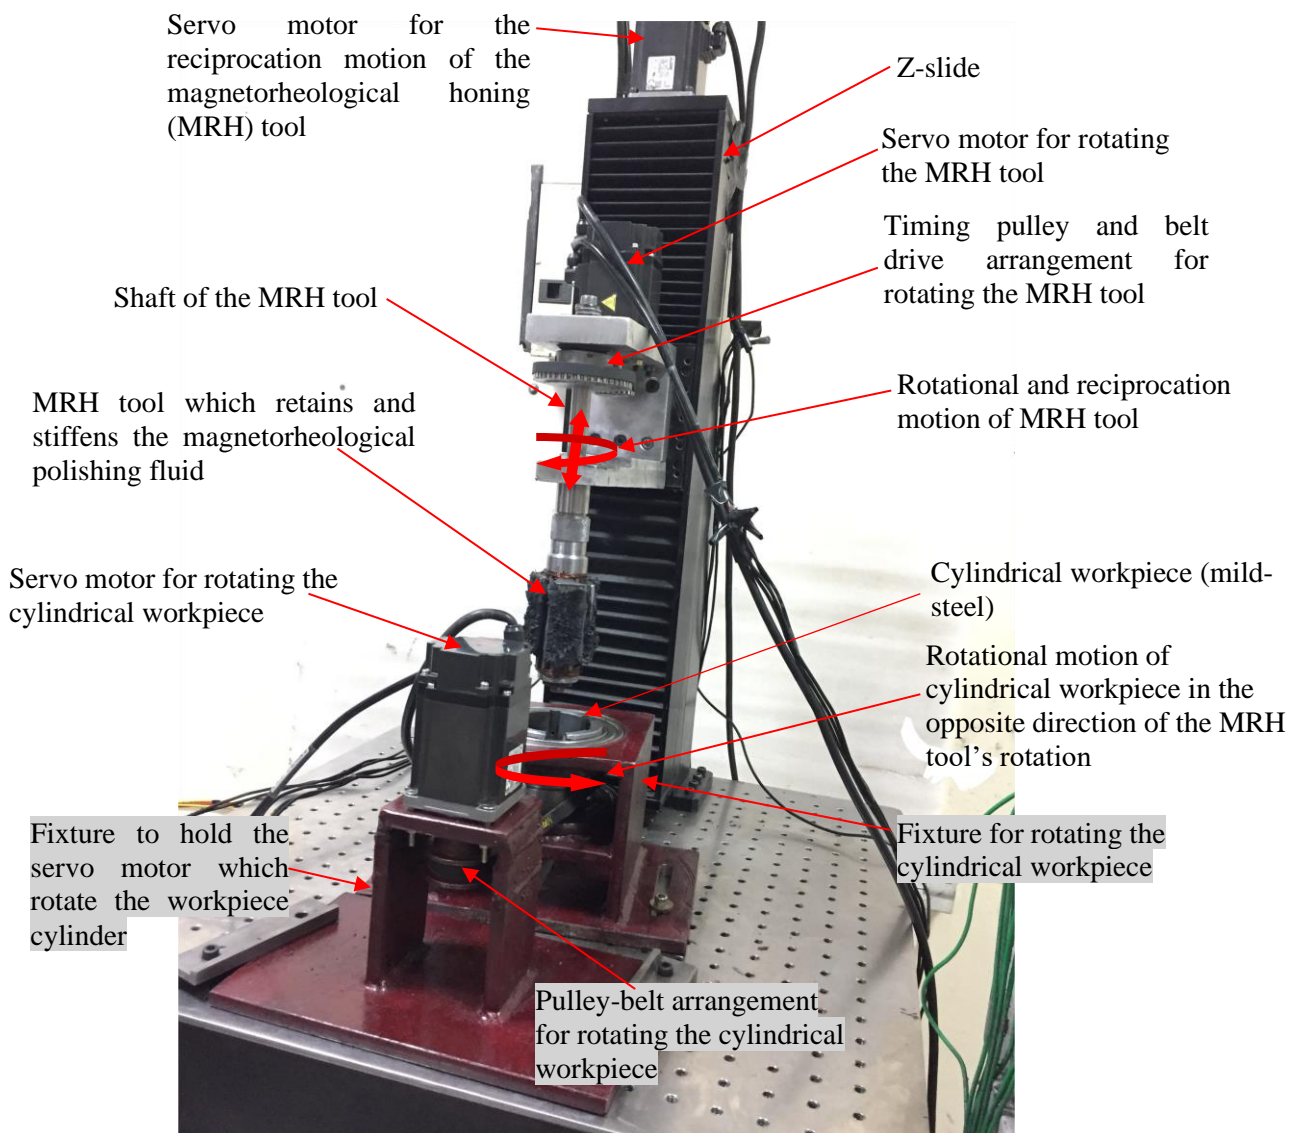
Photograph of the rotational magnetorheological honing process with the fabricated fixture for rotating the workpiece cylinder.
